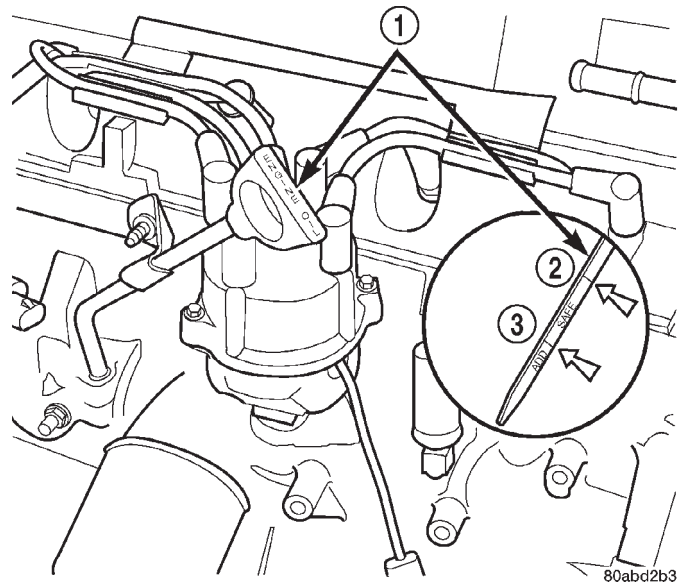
Engine Oil Dipstick Location—2.5L Engine
